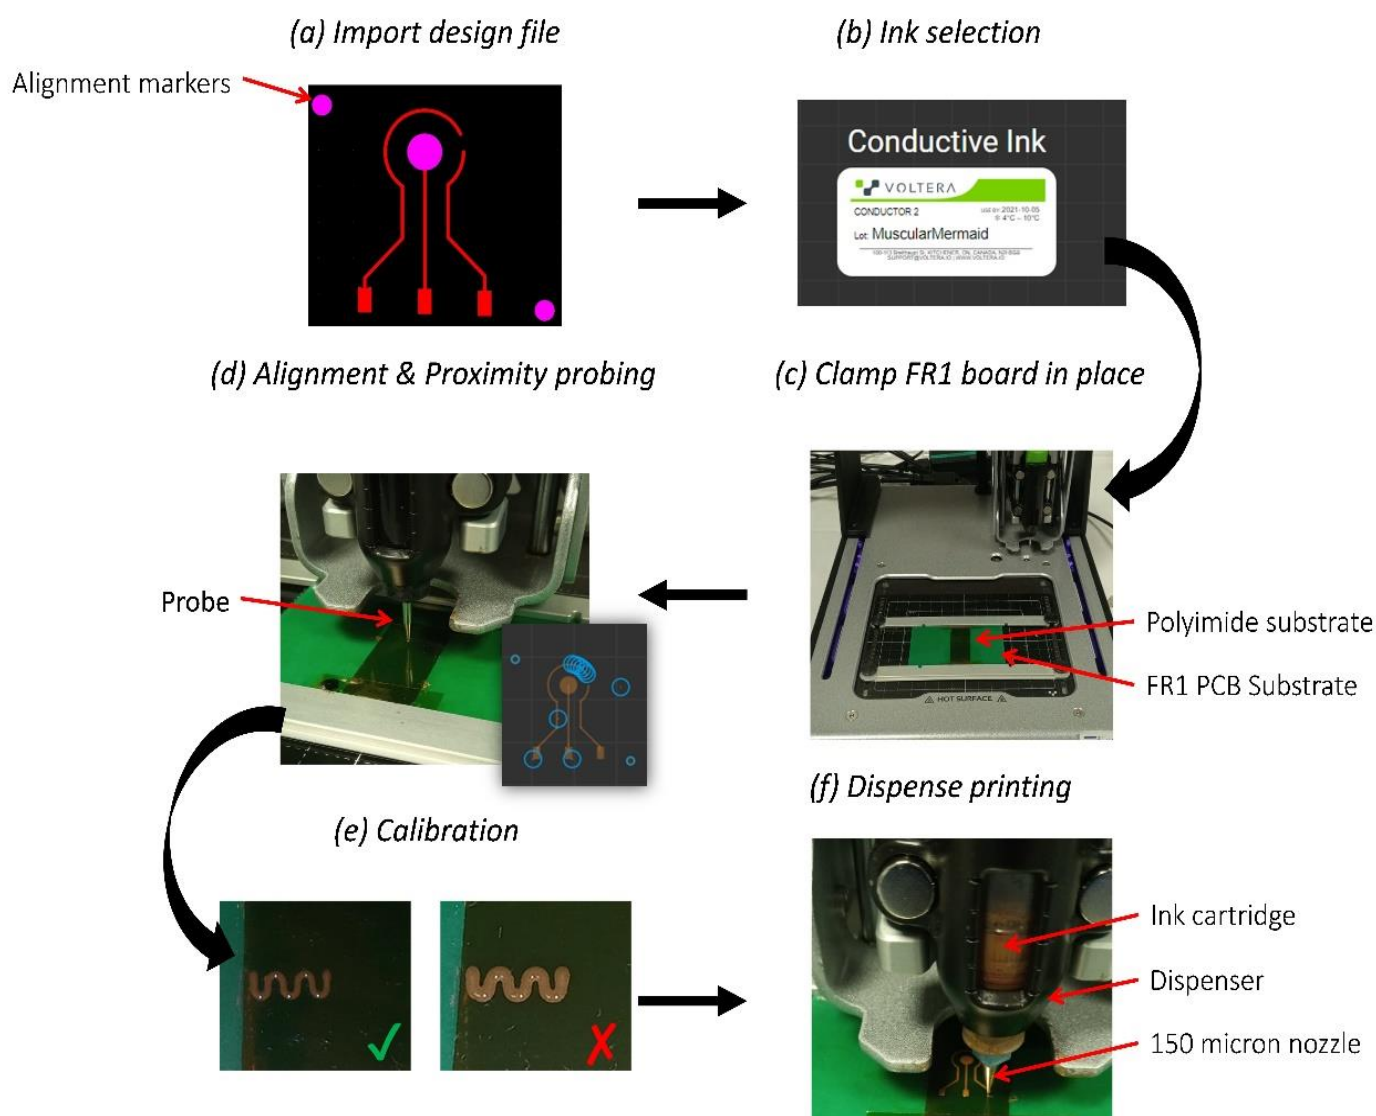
Voltera V-one aligned printing process for the preparation of dispense printed gold electrodes, interconnection tracks and contact pads.
